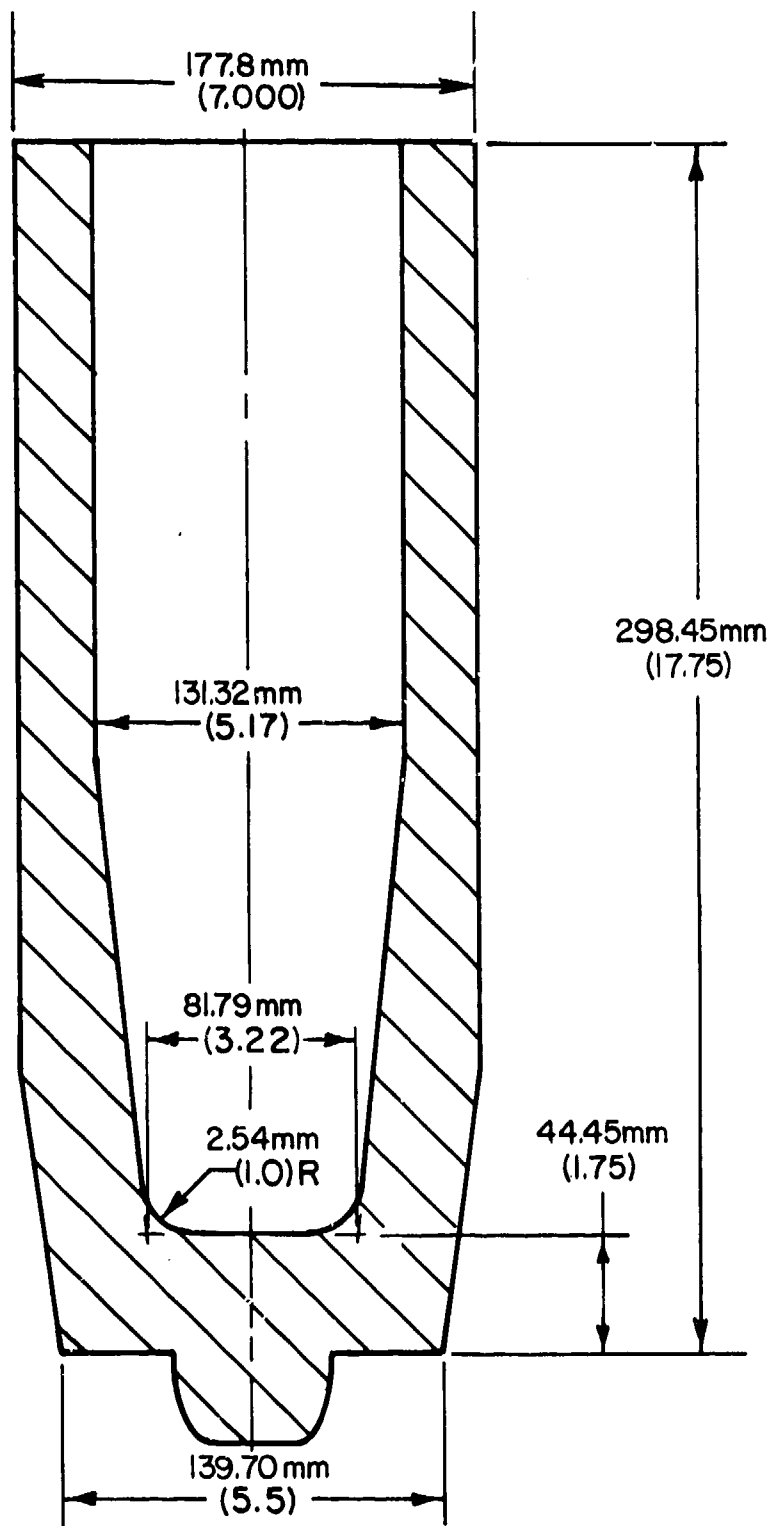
(a). Body of 155 mm M107 shell prior to hot drawing.
